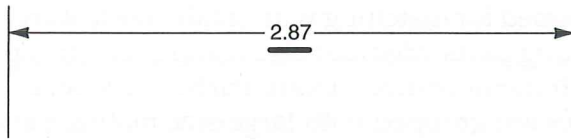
A not-to-scale dimension is indicated by a straight, thick line underneath the dimension that is not to scale.
